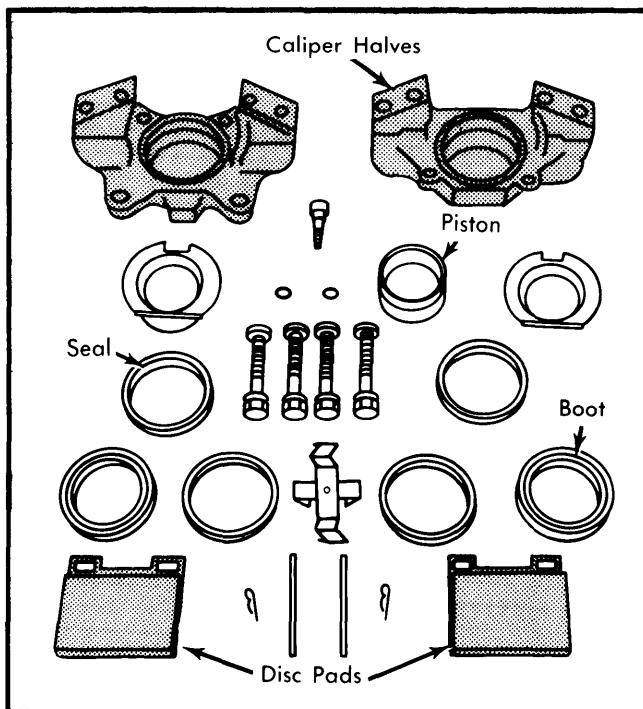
Disassembled View of Typical Mercedes-Benz Brake Caliper
